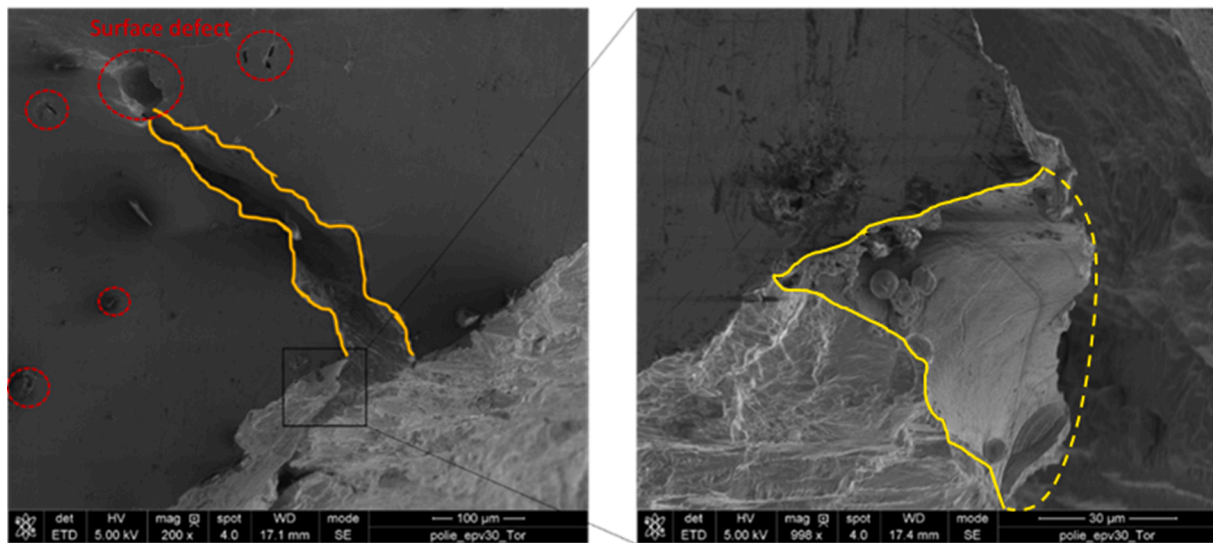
Fracture surface observation on the simple-polished LPBF 316L torsion specimen.
